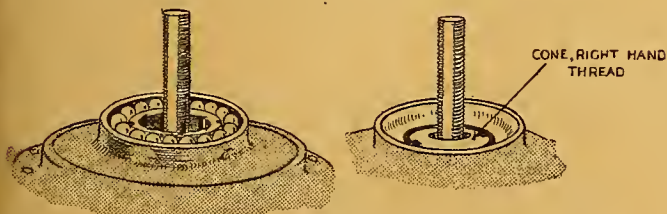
The cone removed from free-wheel end, showing the balls.
